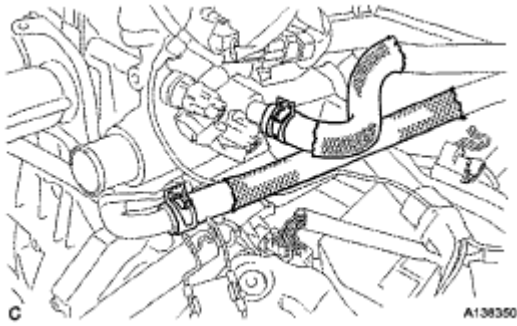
Identifying Heater Outlet/Inlet Water Hose
